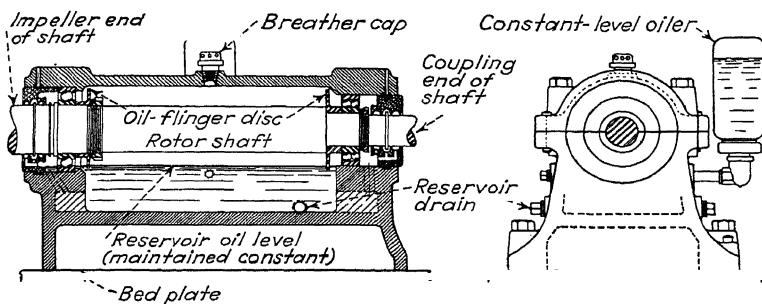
Ballbearing stand for overhung impeller centrifugal blower.
